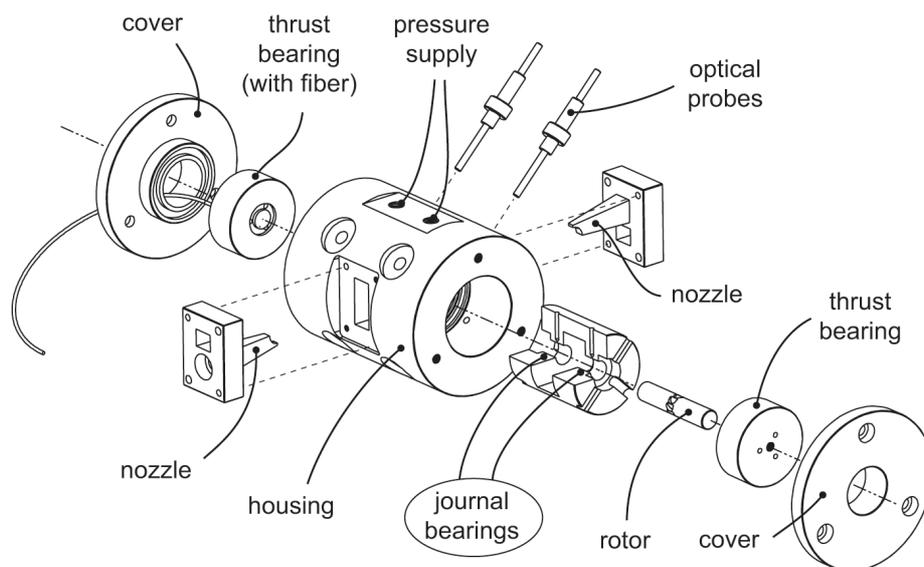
Exploded view of the test setup for validating the stability of various bearing types.
